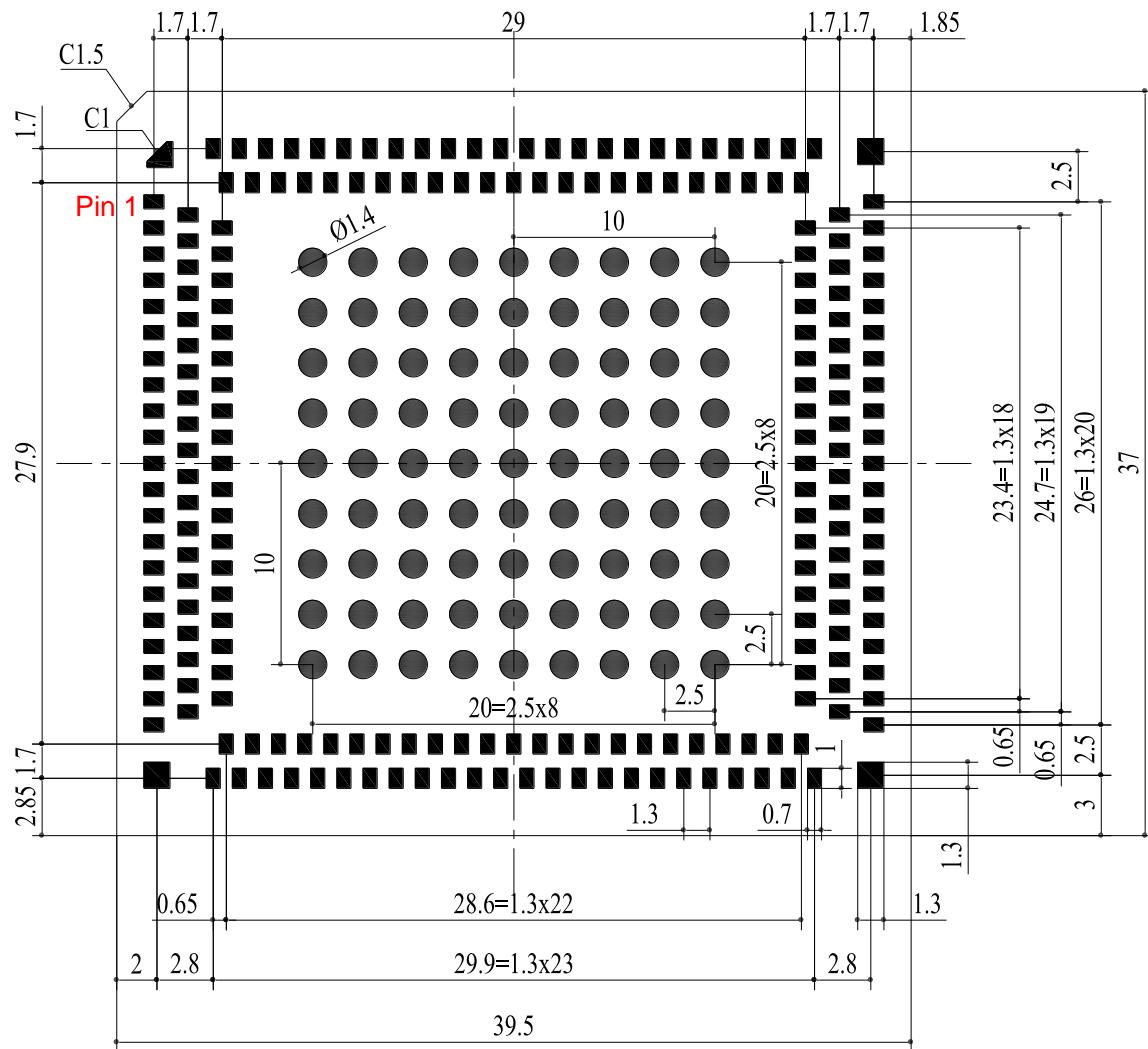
Module Bottom Dimensions (Bottom View, Unit: mm)
